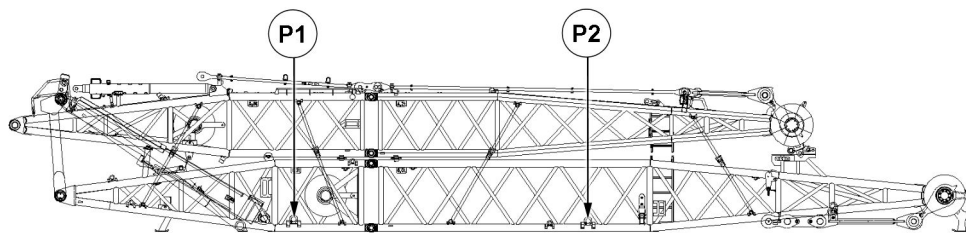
WA-frame 1 pivot section with WA-frame 1 end section and WA-frame 2 pivot section with WA-frame 2 end section unit fastening points
